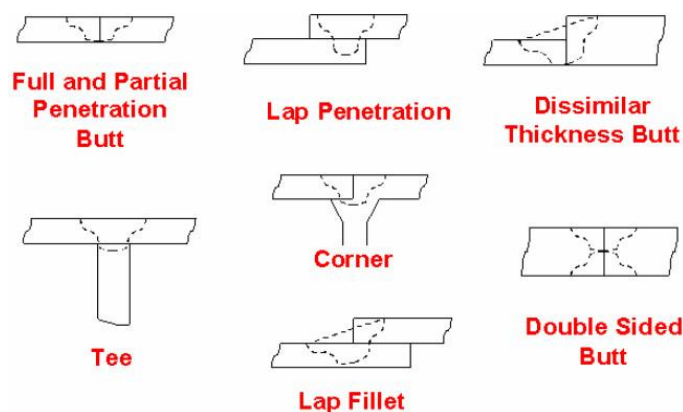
Joint configurations for friction stir welding (Friction Stir Link Inc.).
